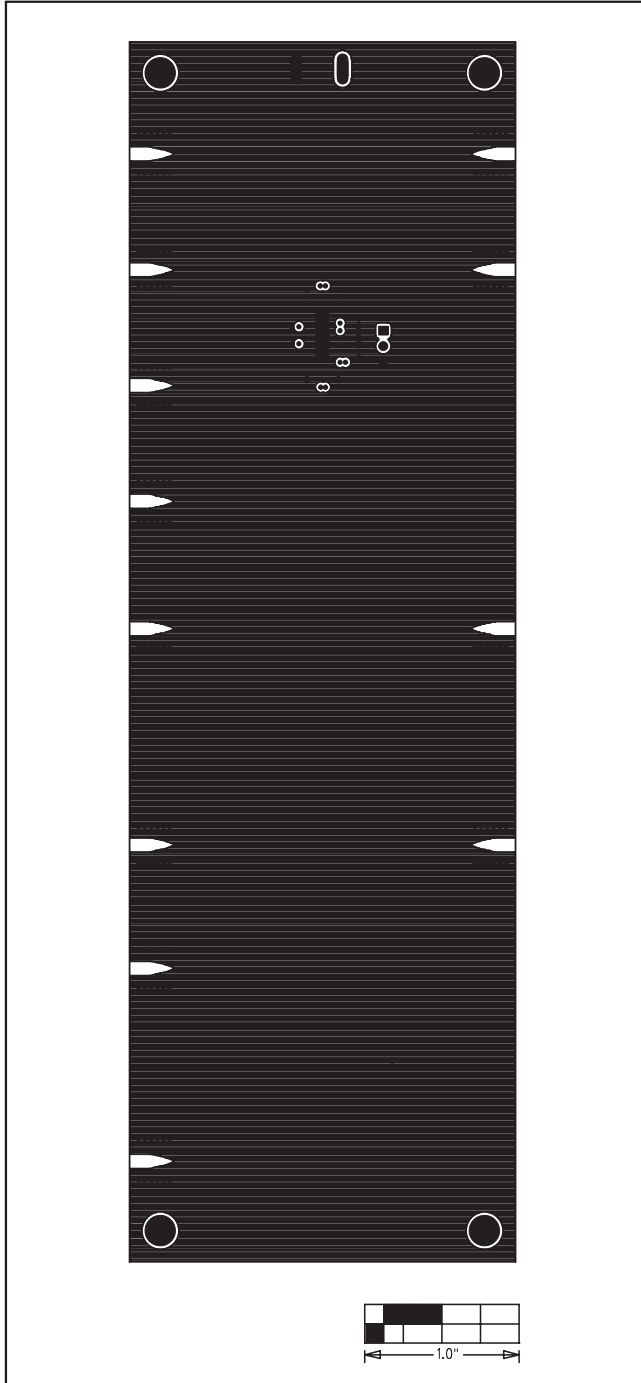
MAX4889B EV Kit PCB Layout—Inner Layer 2
